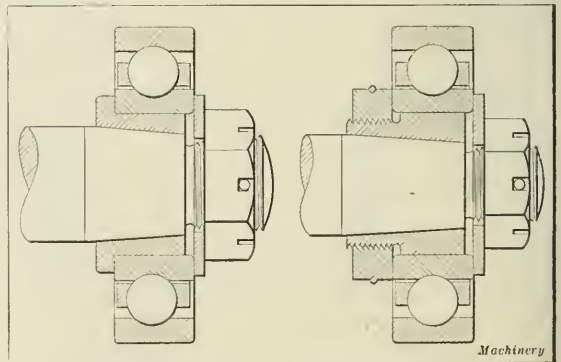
Preferable Method of mounting Bearing on Tapered Shaft
